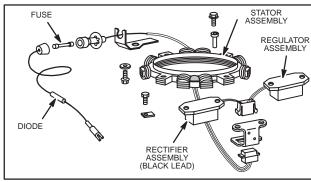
7 AMP ALTERNATOR ASSEMBLY
